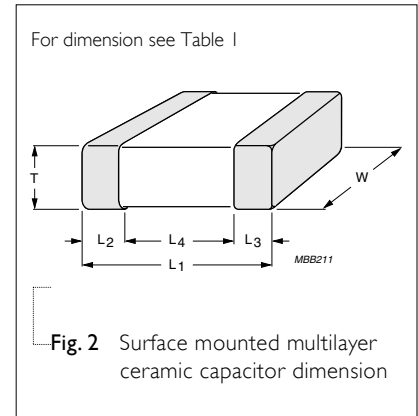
Surface mounted multilayer ceramic capacitor dimension
